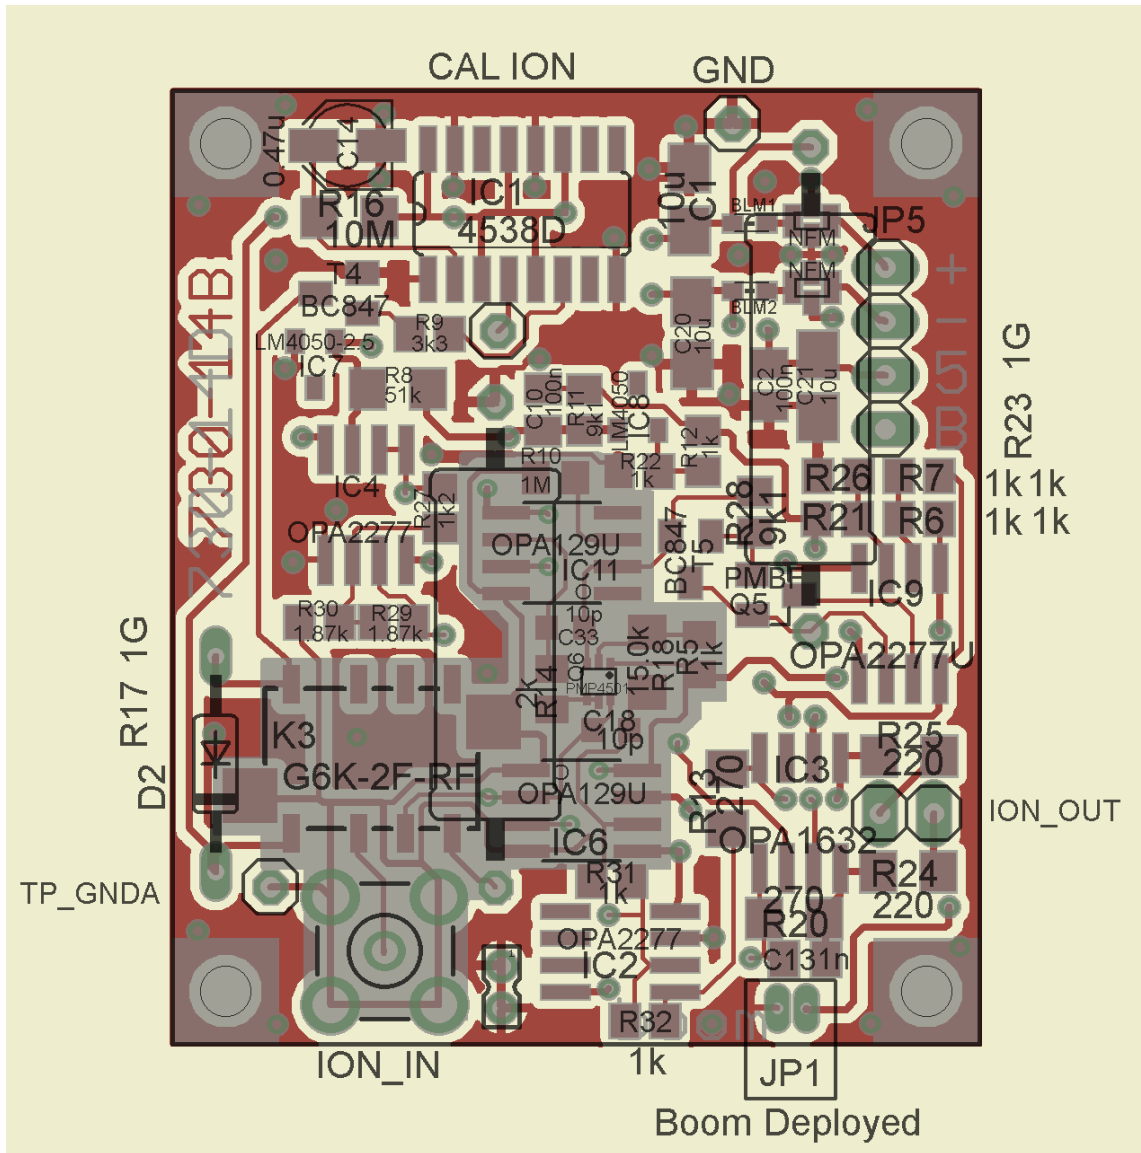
PCB Top layer. Note the removed solder mask around the input node.
